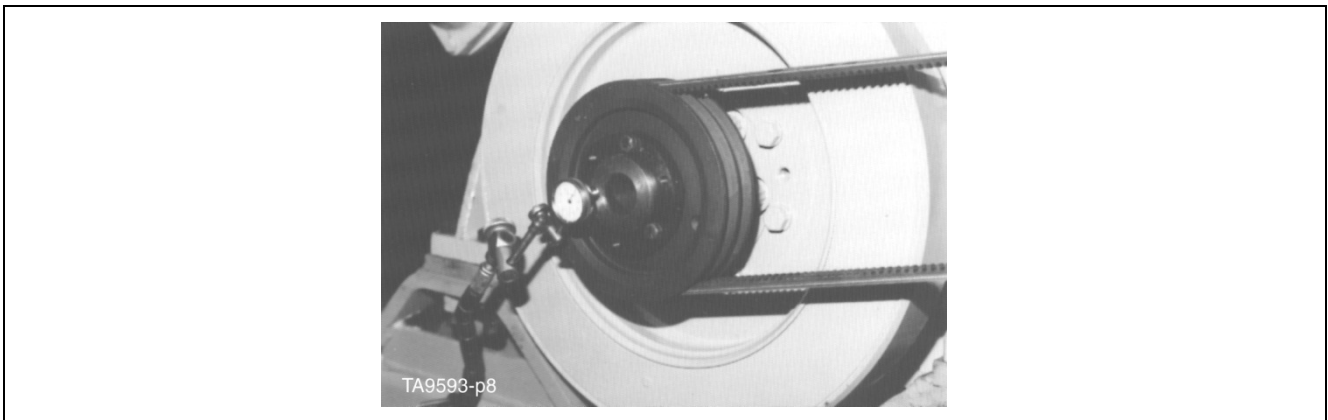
Measurement of axial runout of engine flexplate mating surface
